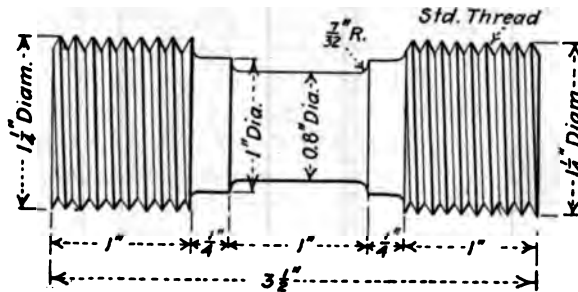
STANDARD FORM OF TEST SPECIMEN REQUIRED FOR TENSION TESTS OF GRAY-IRON CASTING MATERIAL
